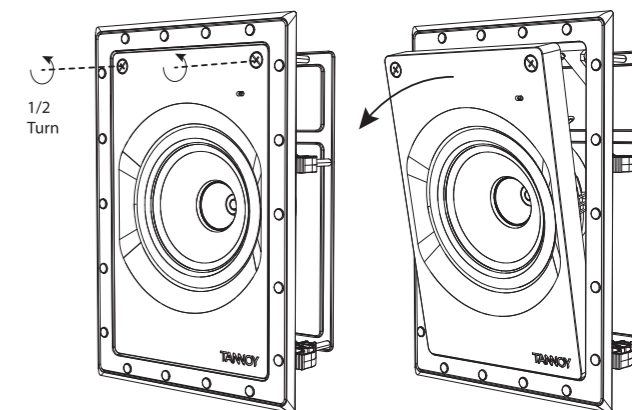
Removing the Loudspeaker Assembly from the Frame
